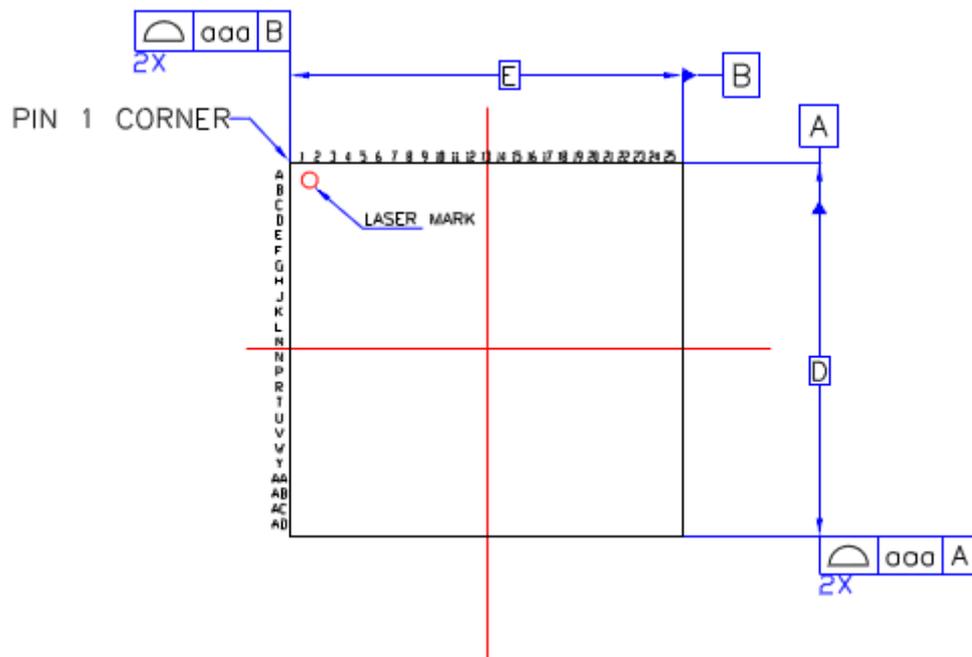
1. 12.8 mm x 12.3 mm Package Top View
